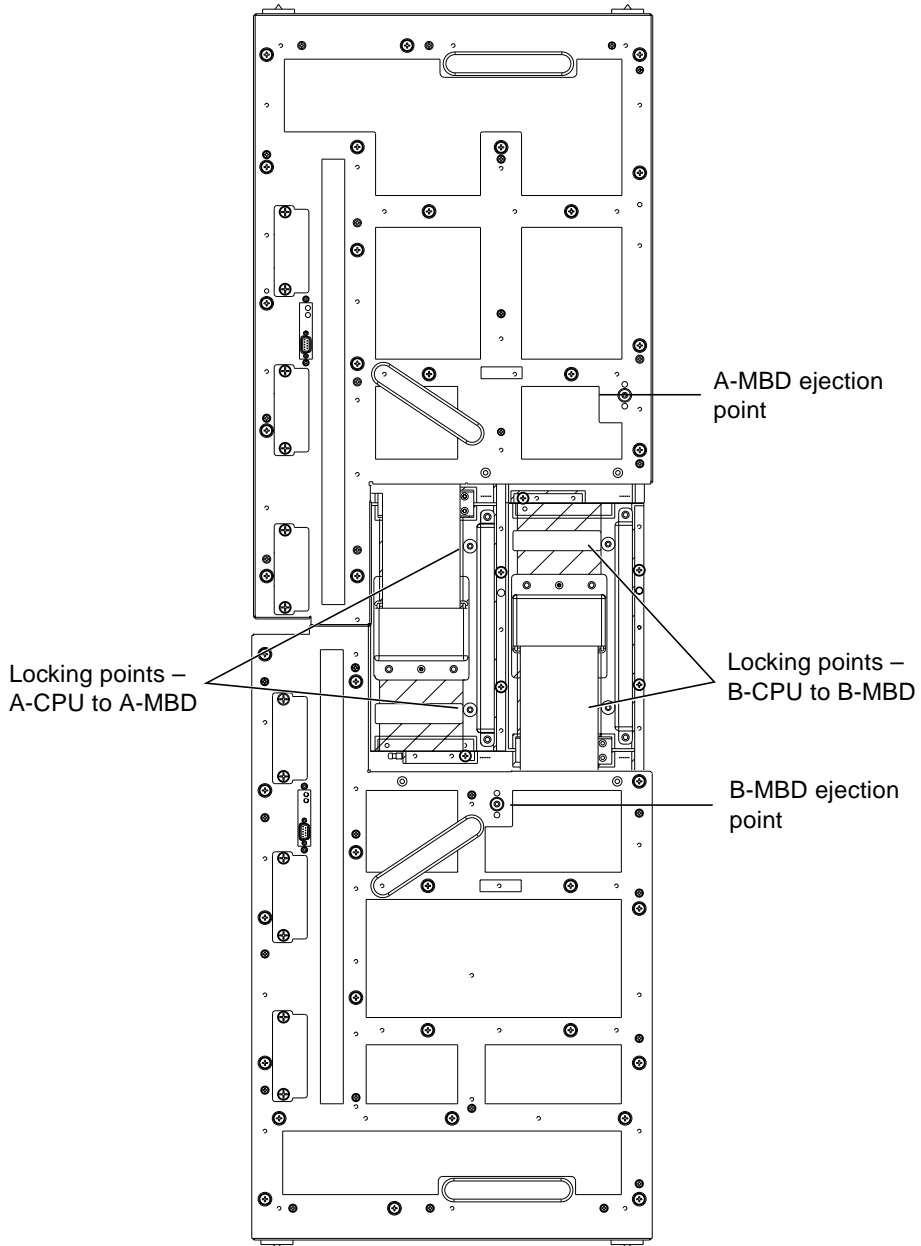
Location of CPUset Module Locking and Motherboard Ejection Points
